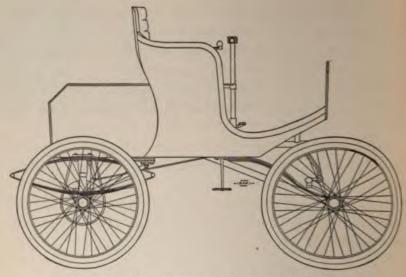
THE HASBROUCK MOTOR CARRIAGE.
